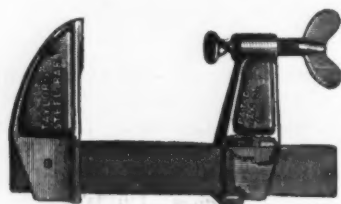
The Taylor Steel Bar Screw Clamp No. 20.
